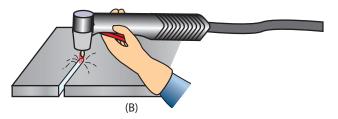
It is easier to make straight, smooth cuts if you can brace the torch closer to the tip, as in cut B.
